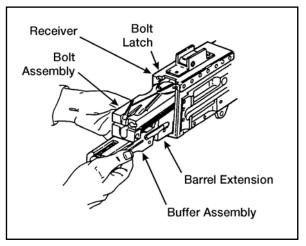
Installation of the bolt assembly within the barrel extension and buffer assembly
